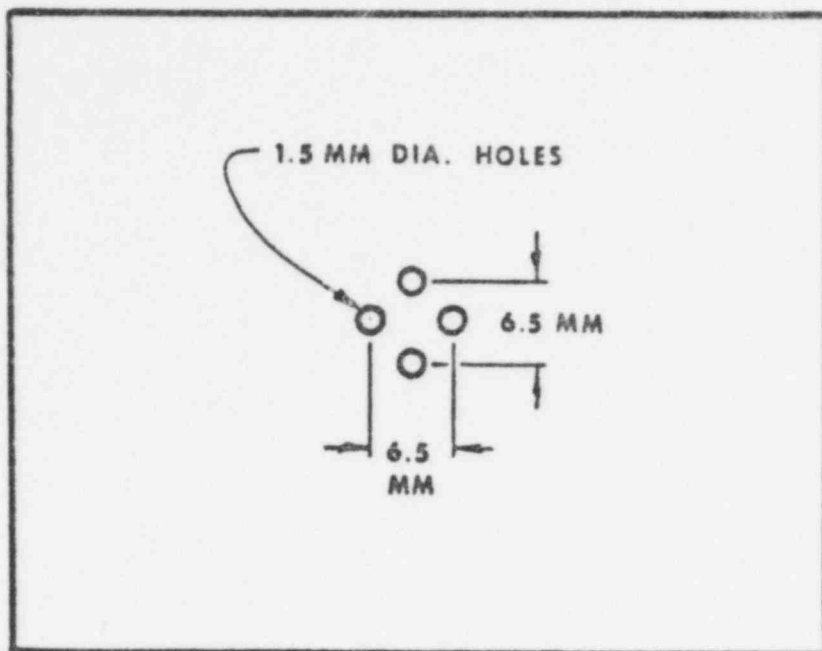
Flat-bottom hole array specimen. This specimen consists of an aluminum block with four blind holes drilled in the bottom. During test the block is placed in the tank so that the holes are on the side opposite the transducer.
